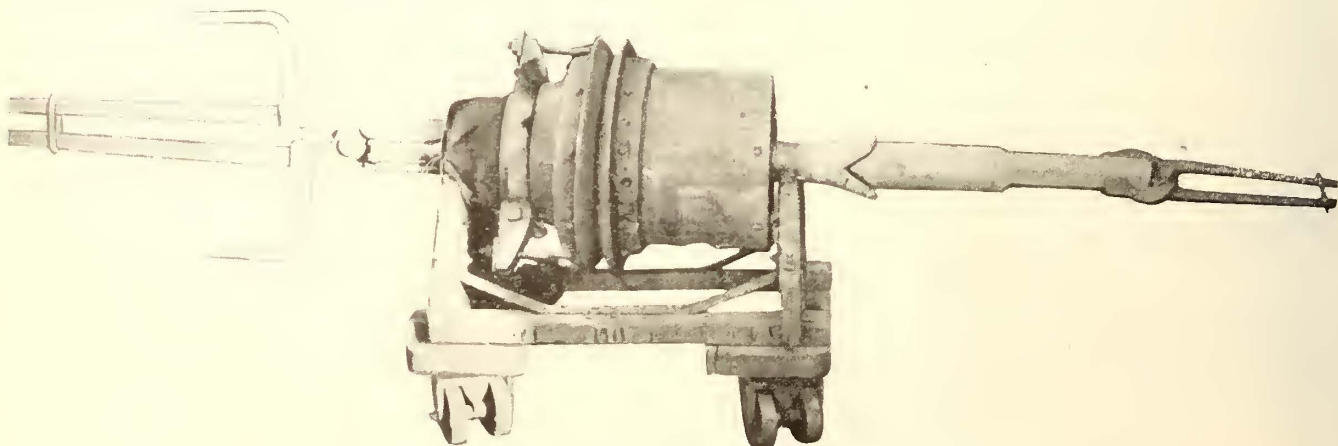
San Francisco Welding—Type of Weld on Armature Shaft
